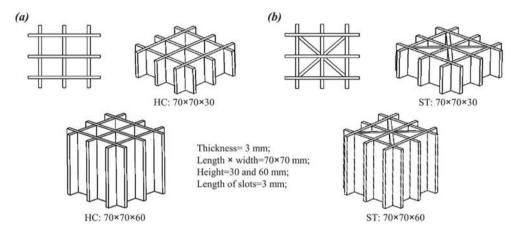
Structural dimension of two core designs: (a) honeycomb core; (b) star core.
